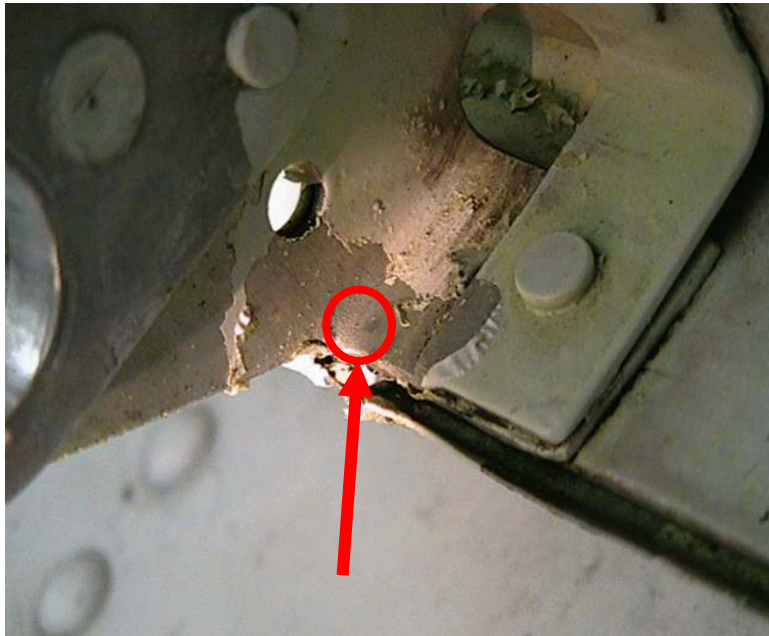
Crack in the Bracket Supporting Cessna 402C Left Inboard Elevator Attach Fitting
